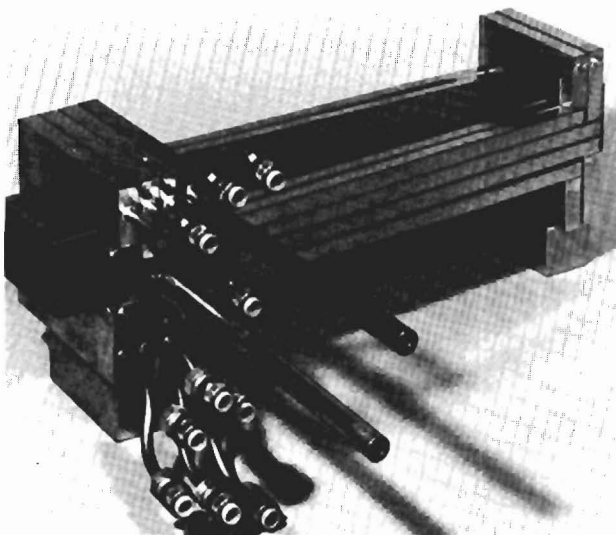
Brazed coil assembly, TR-BM-01, 04
